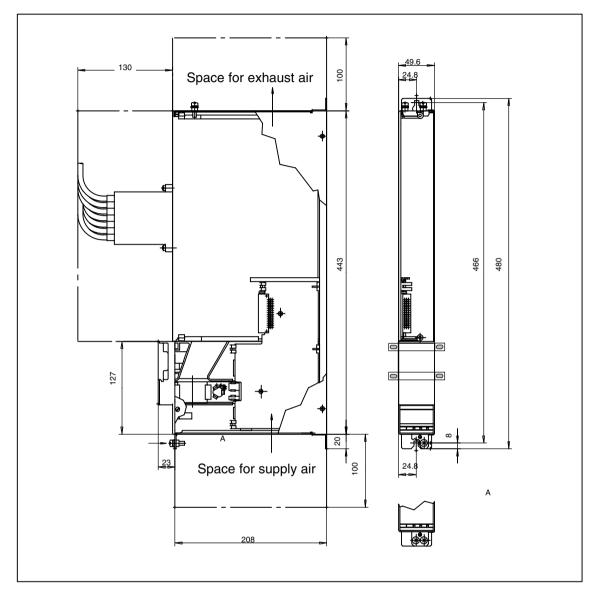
NCU cassette for Sinumerik 840D, dimensional drawing and installation instructions
